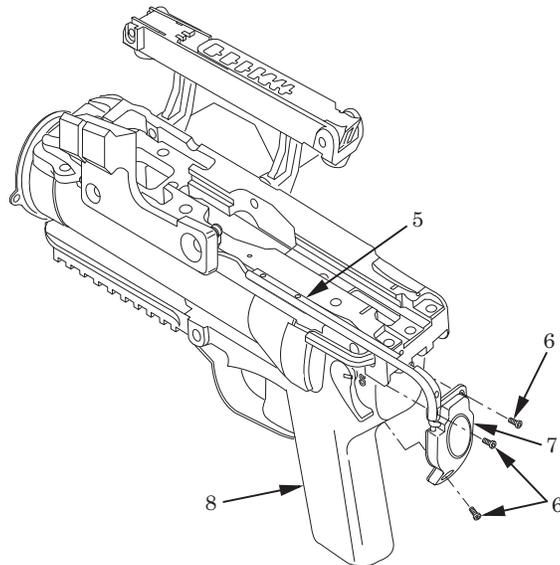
Removal of Remote Switch Assembly from Pistol Grip Assembly.
